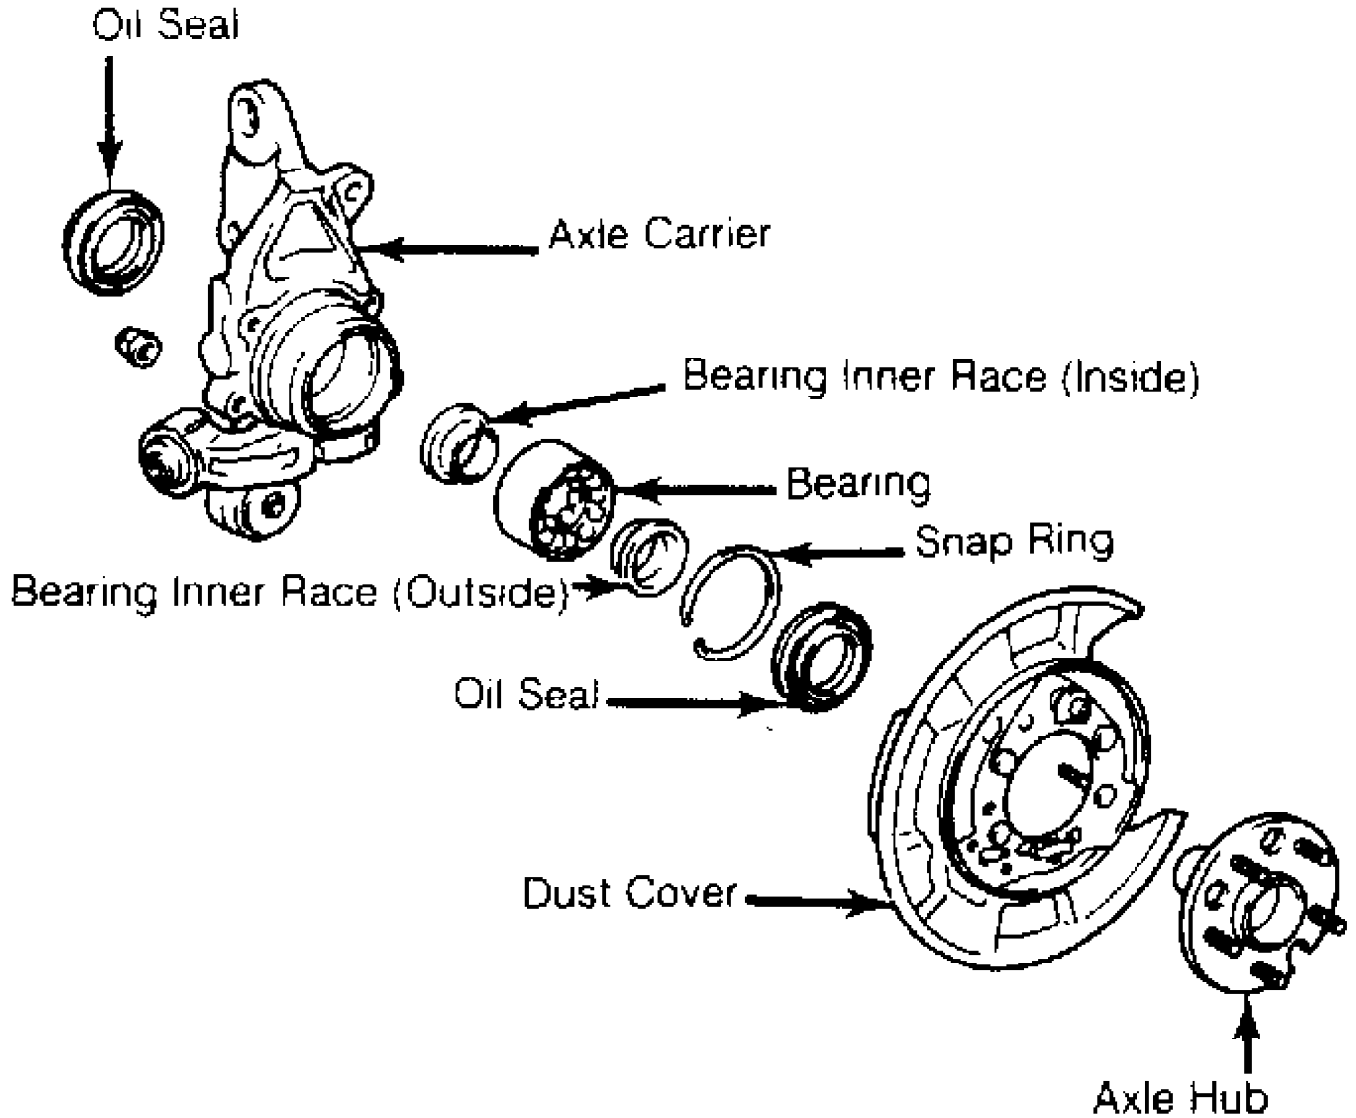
Exploded View of Camry & Celica All-Trac Axle Carrier
